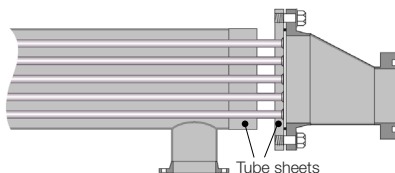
Double tube sheets prevents cross-contamination between the product and the heating/cooling media.
